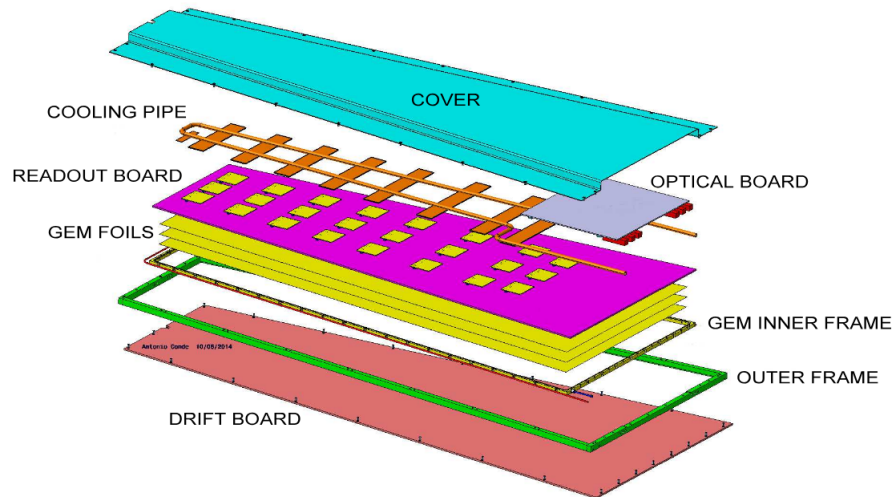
Exploded view of the mechanical design of a single GE1/1 chamber. [CSS15]
